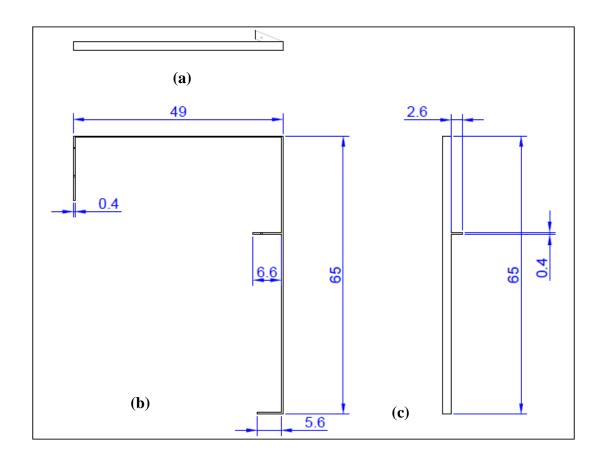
(a)Top view, (b) Front veiw, (c) Side view
